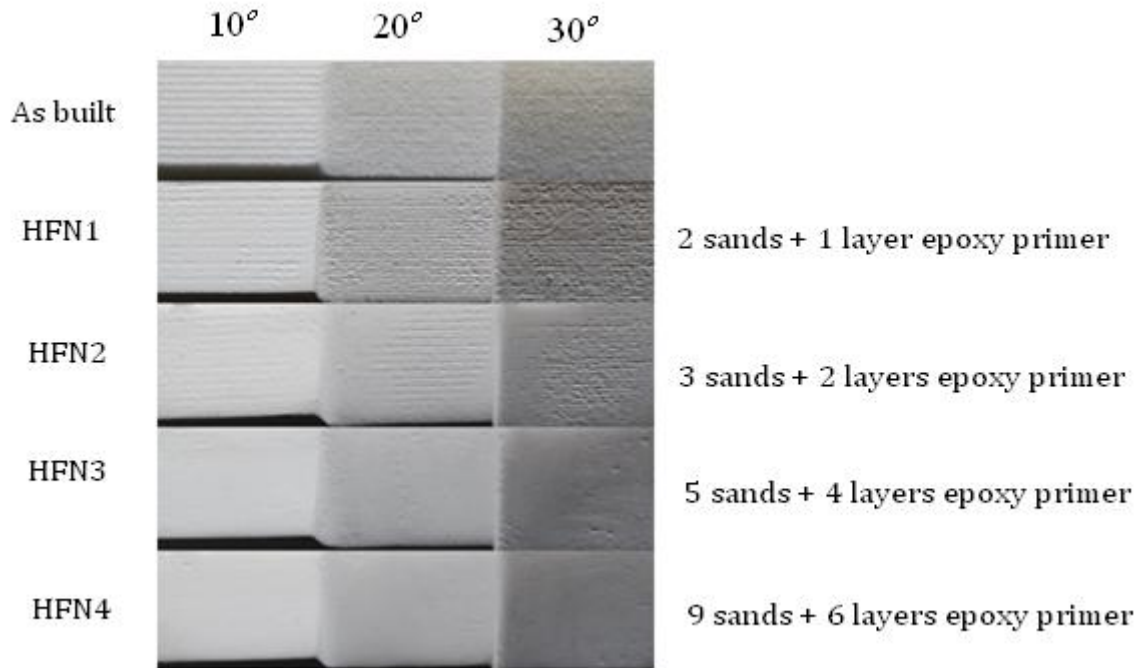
Improvement of surface finish of nylon test pieces by sanding and epoxy priming
